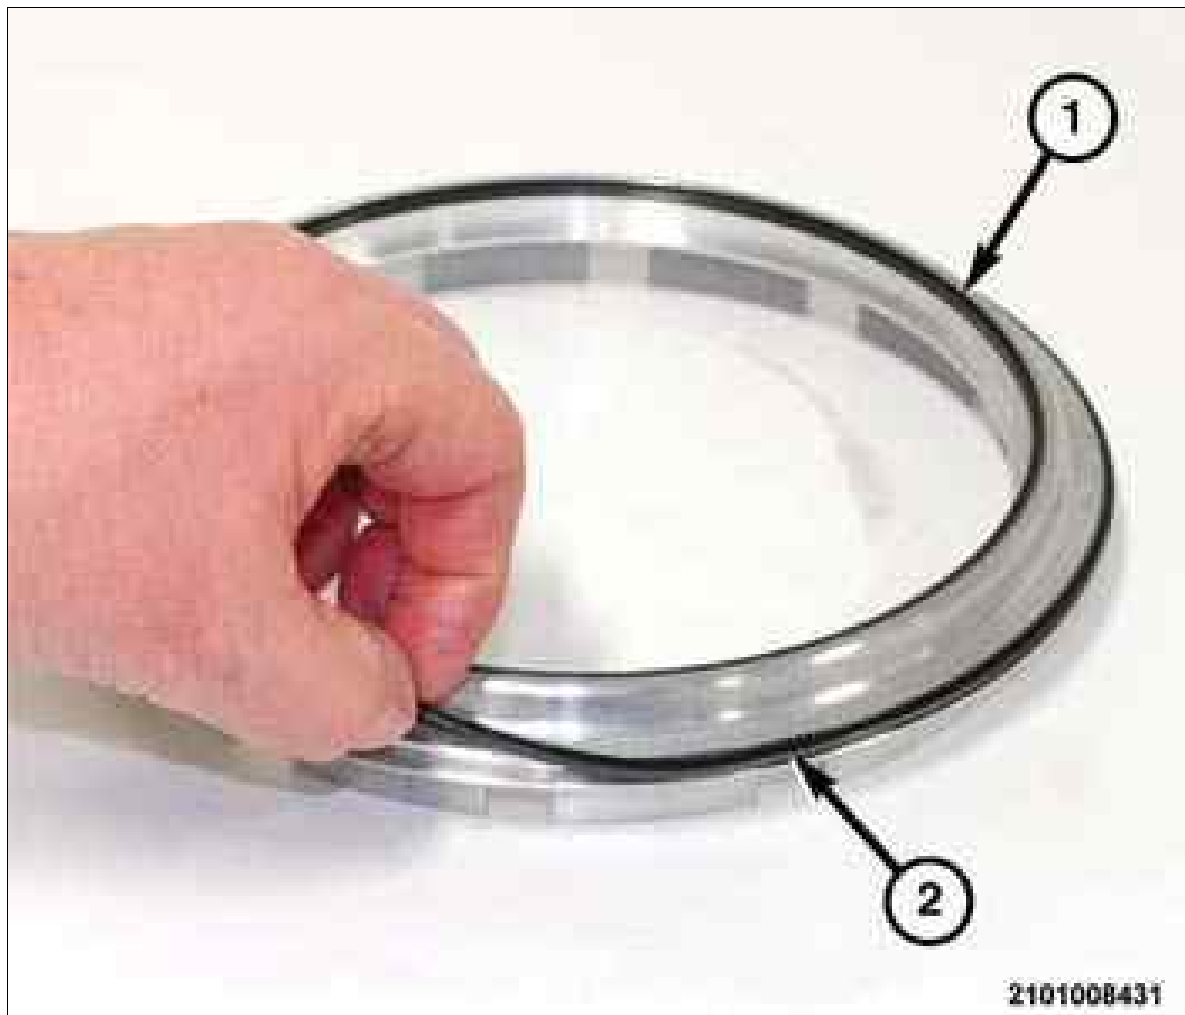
D-Clutch Piston Retainer & O-Ring Seal
